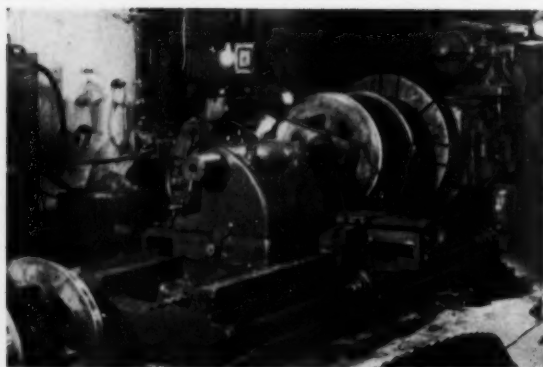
A 48-in. engine lathe in the No. 17 underground shop machining the drivers for a 15-ton locomotive.
